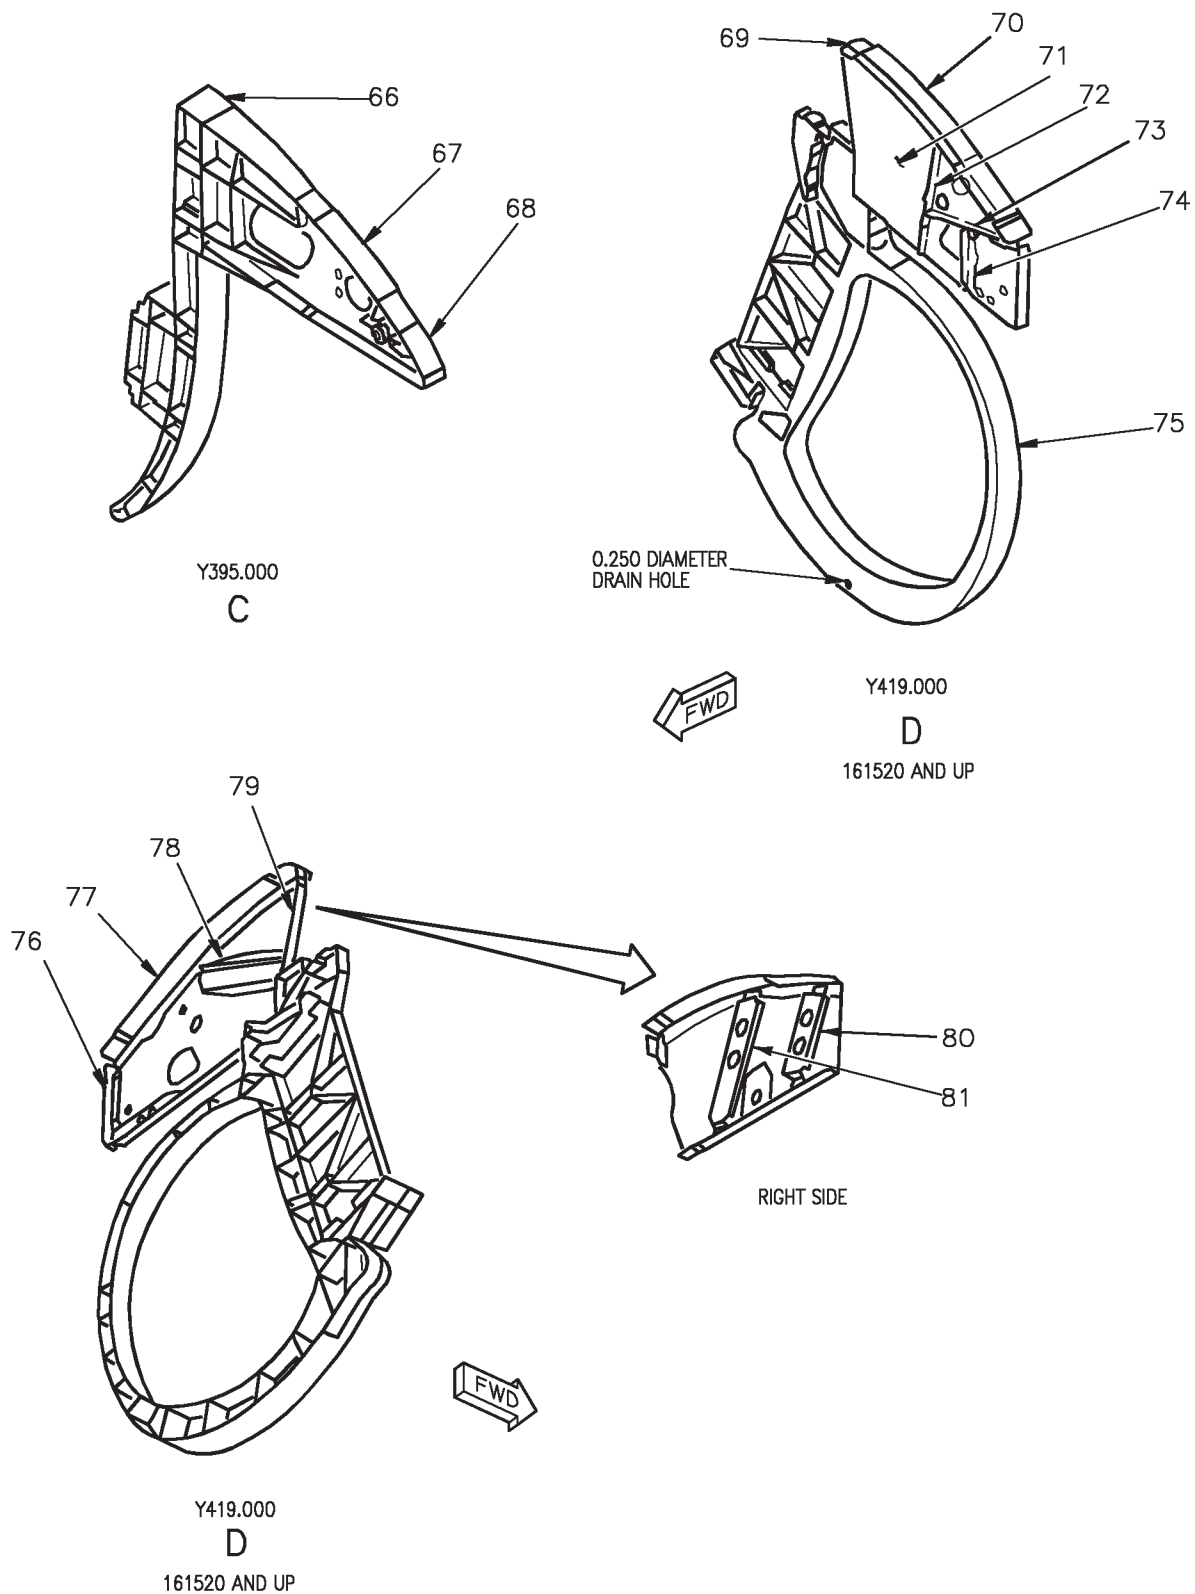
Air Inlet Bulkheads, Formers, Longerons and Stringers (Sheet 4)
